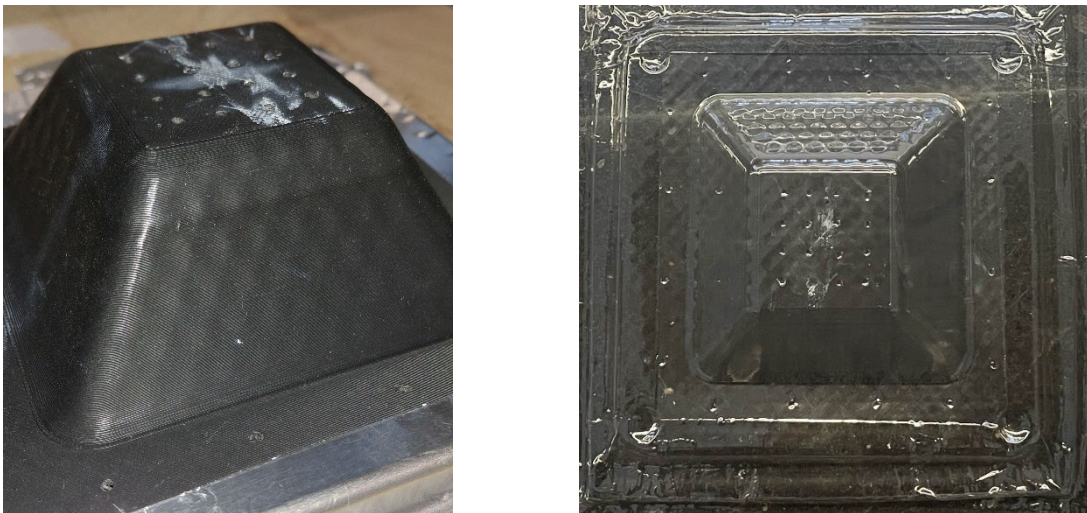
Mould No. 3 after 2 cycles outer skin with honeycomb pattern at surface (left), thermoformed sheet showing imprint of honeycomb pattern (right).
